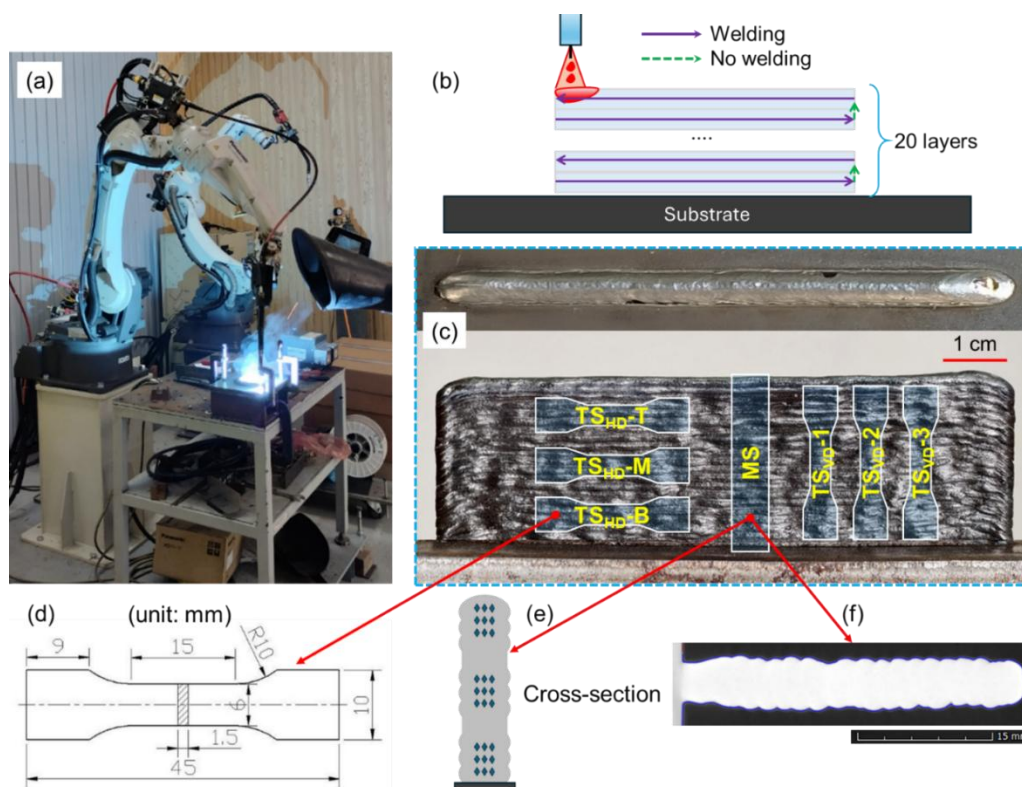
(a) The GMAW-AM robot, (b) the deposition method of the thin wall, (c) the weld bead and thin wall fabricated with the optimal process parameters and positions to extract tensile testing samples (TSHD and TSVD) and the metallographic sample (MS), (d) the dimensions of tensile testing samples, (e) locations for measuring microhardness, and (f) X-ray CT scanning of the MS sample
